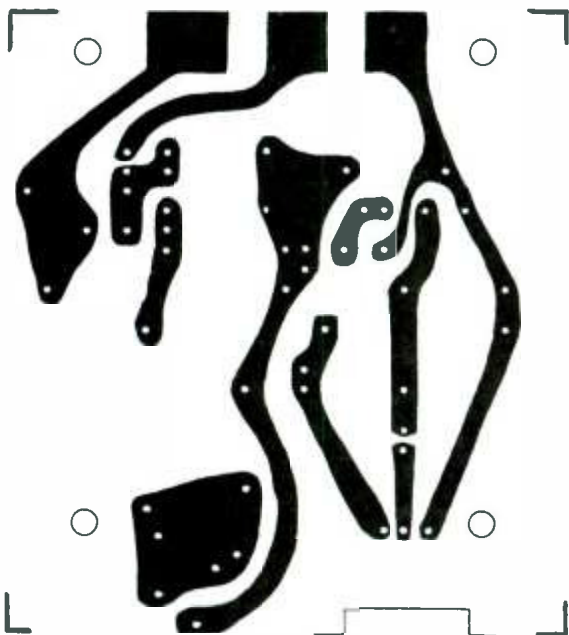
Same-size foil pattern that can be used to make a printed-circuit board for your home-brew project. Should you use a Vector board with a hole-grid pattern spaced .1-inch apart, lay this diagram on it and insert the flea clips in position from the bottom of the pre-drilled board.
